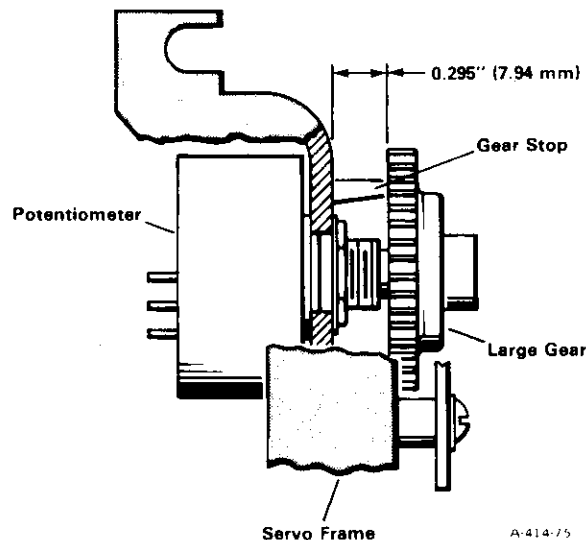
Position of Large Gear in Relation to Surface of Servo Frame
